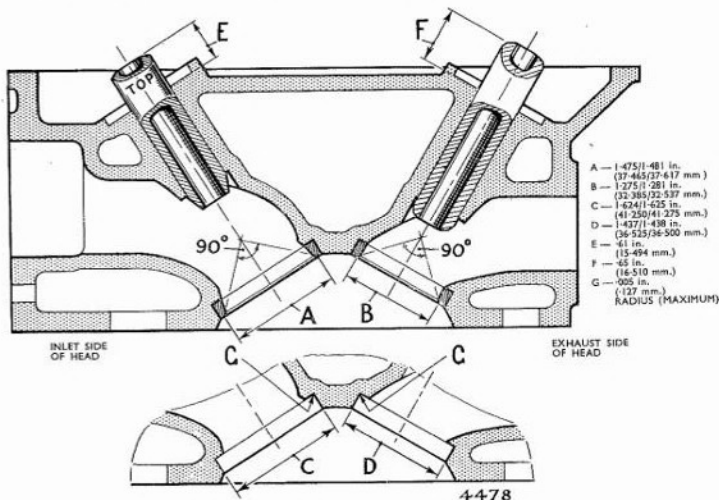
Cylinder head machining dimensions to accommodate valve seat inserts, also valve guide pressing dimensions
